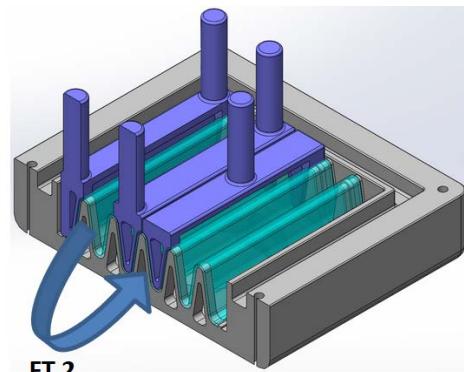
Filter Tool 2 Removal & Insert into 4th slot
